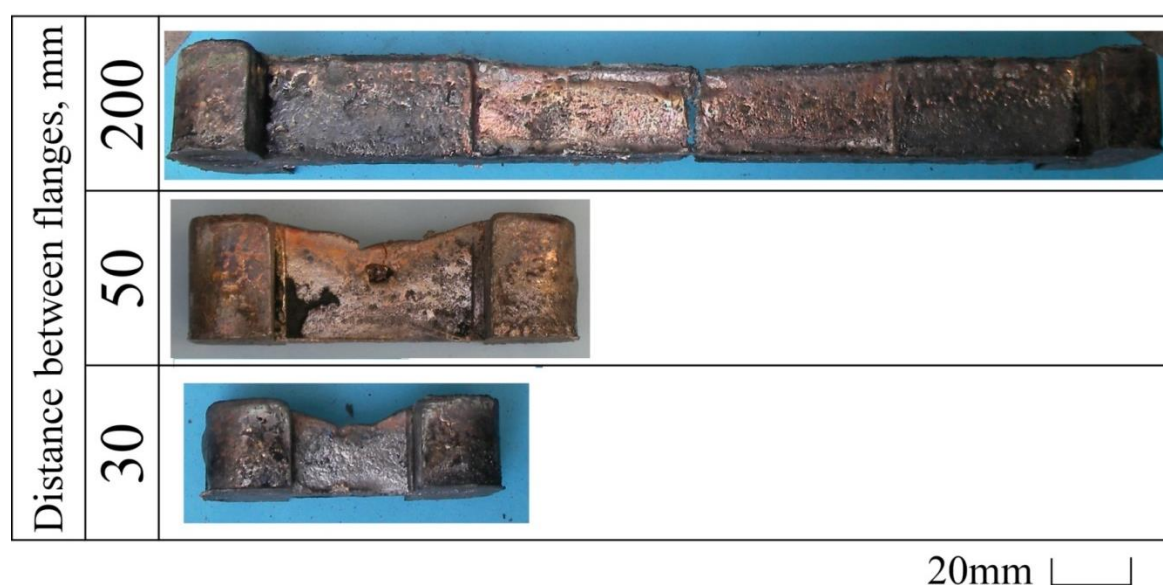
Appearances of hypermonotectic Pb bronze alloy castings in permanent mold for solidification cracking test.
